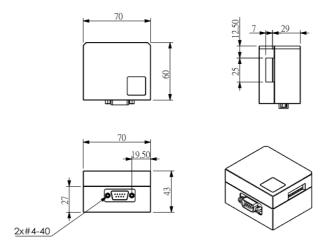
Mechanical drawing of the OV-50D.
